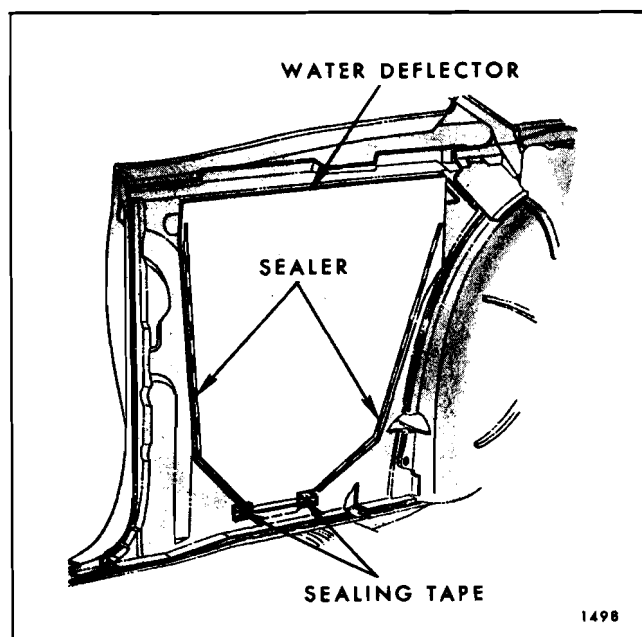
Rear Quarter Inner Panel Sealing - Typical of Water Deflector Installation
